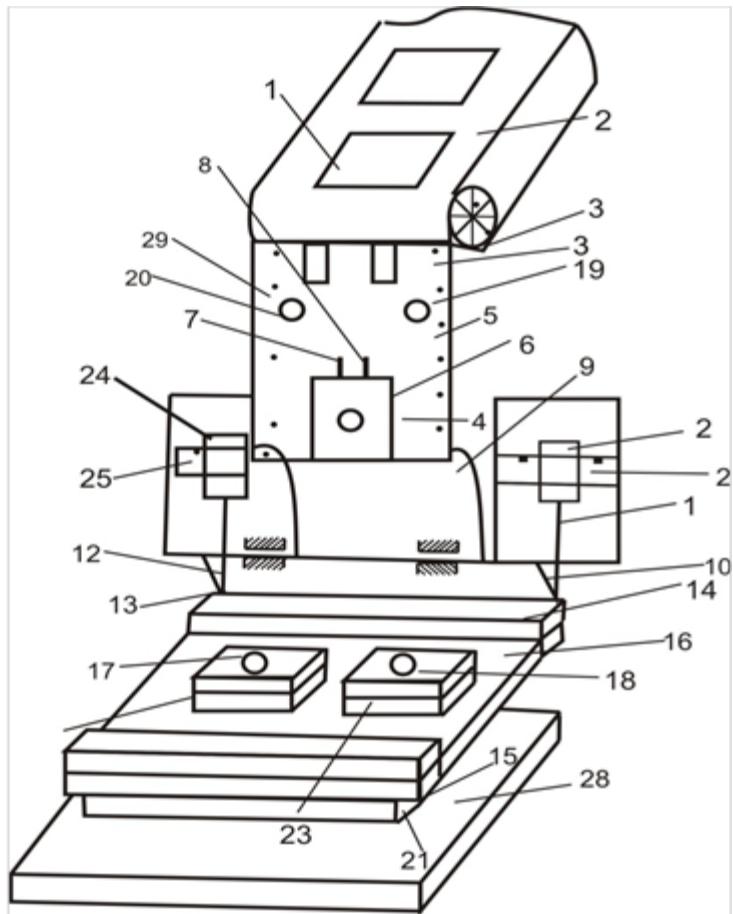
Special converting manipulator for turning a part in the form of one sheet onto a second sheet
